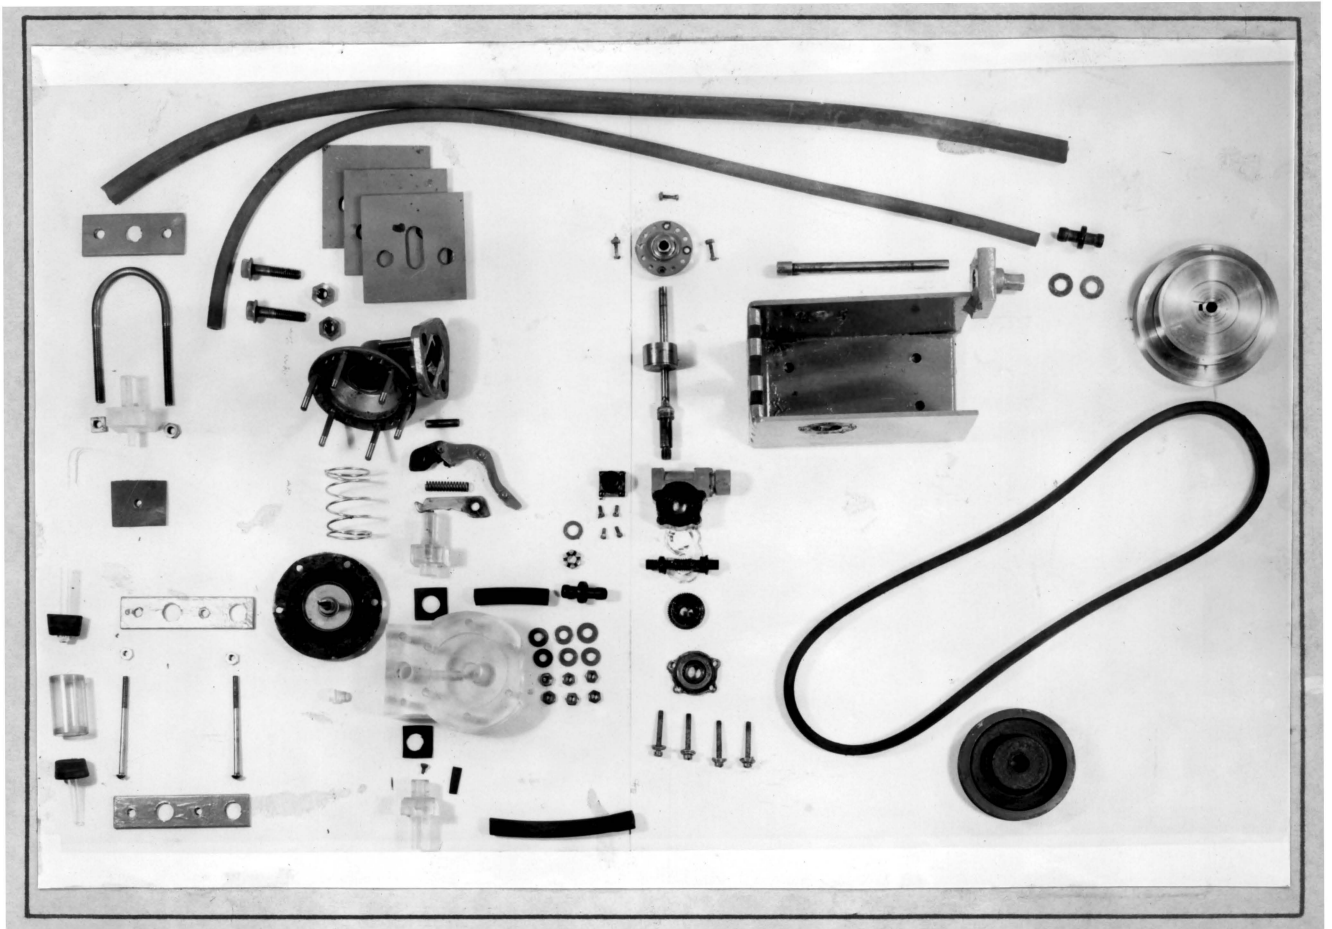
COMPONENT PARTS OF WORKING MODEL
